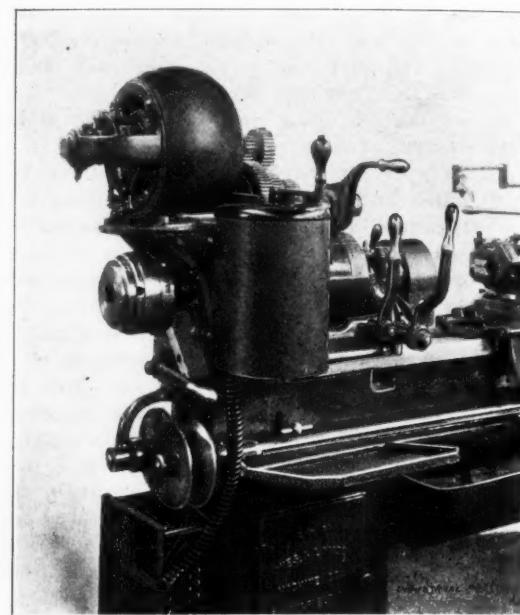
Jones & Lamson Lathe Driven by Northern Electrical Motor.
